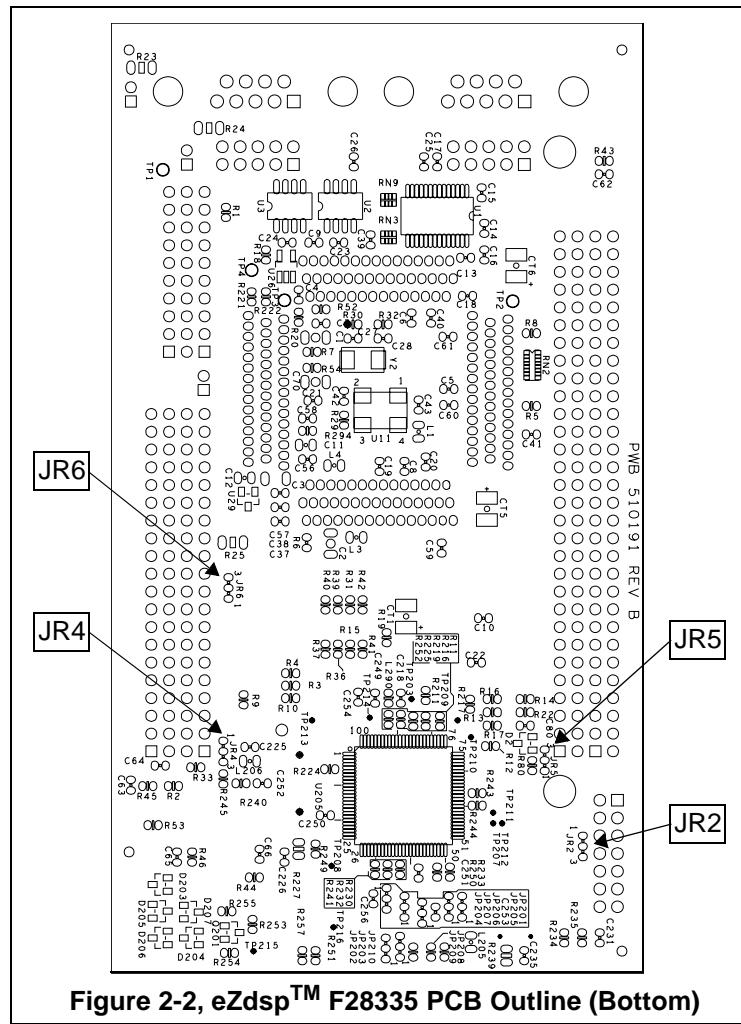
, eZdsp™ F28335 PCB Outline (Bottom)
